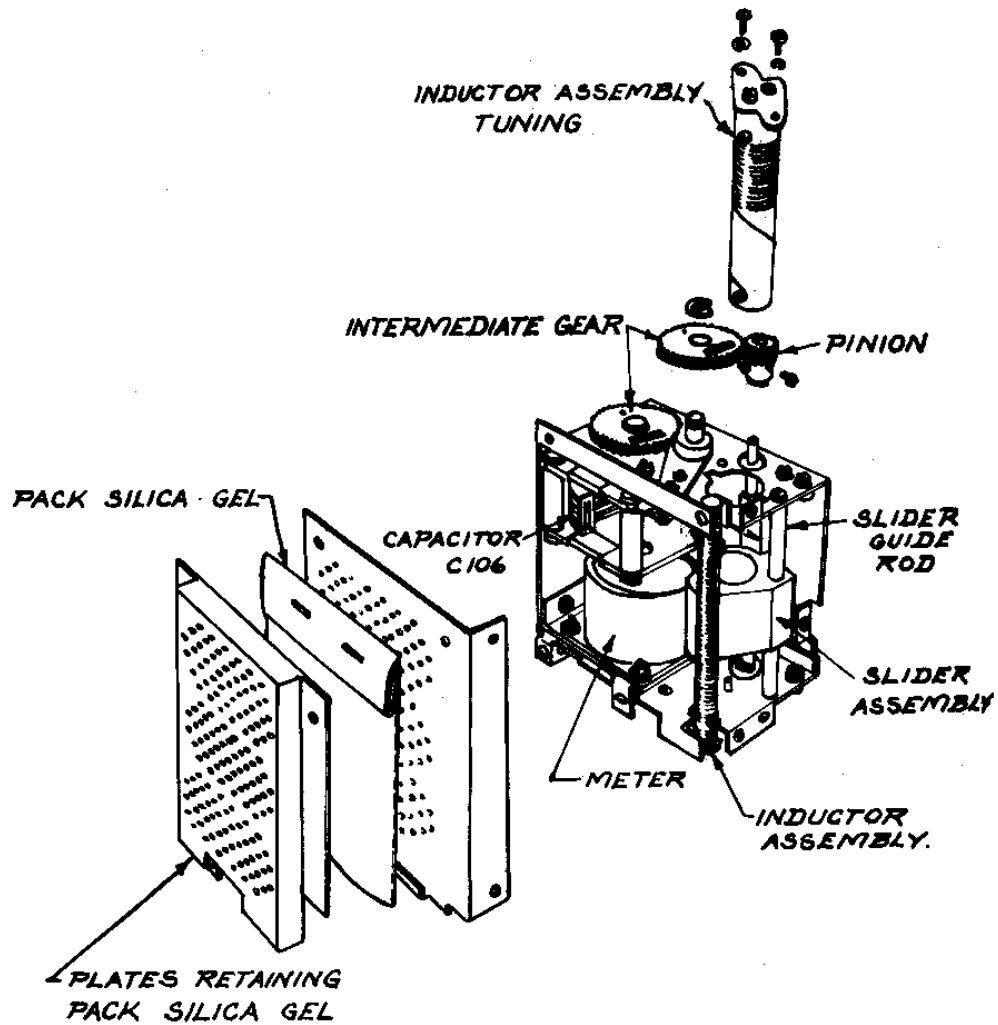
TRANSMITTER TUNING ASSEMBLY
